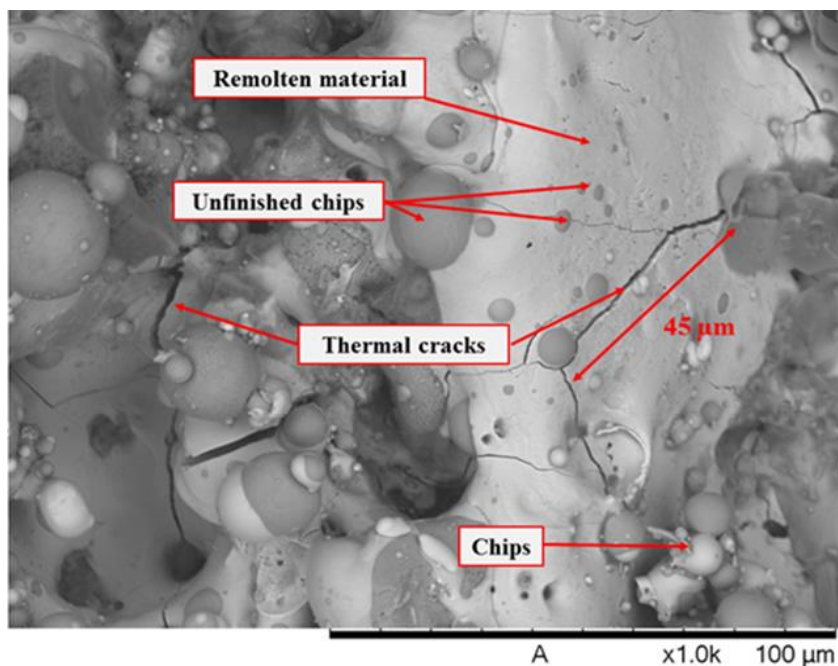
Presence of surface defects on Nd-Fe-B sample after machining obtained with TM3030 Microscope.
